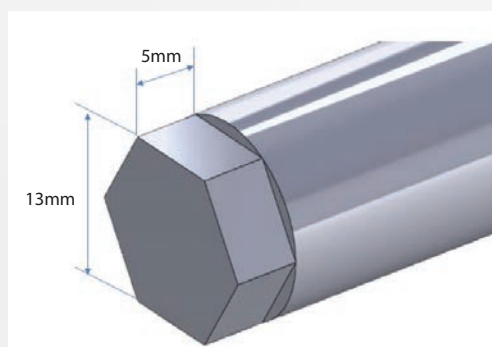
Cutting condition and work shape image of a cutting trial between a conventional 2-flute end mill and the AE-VTSS 3-flute end mill.
